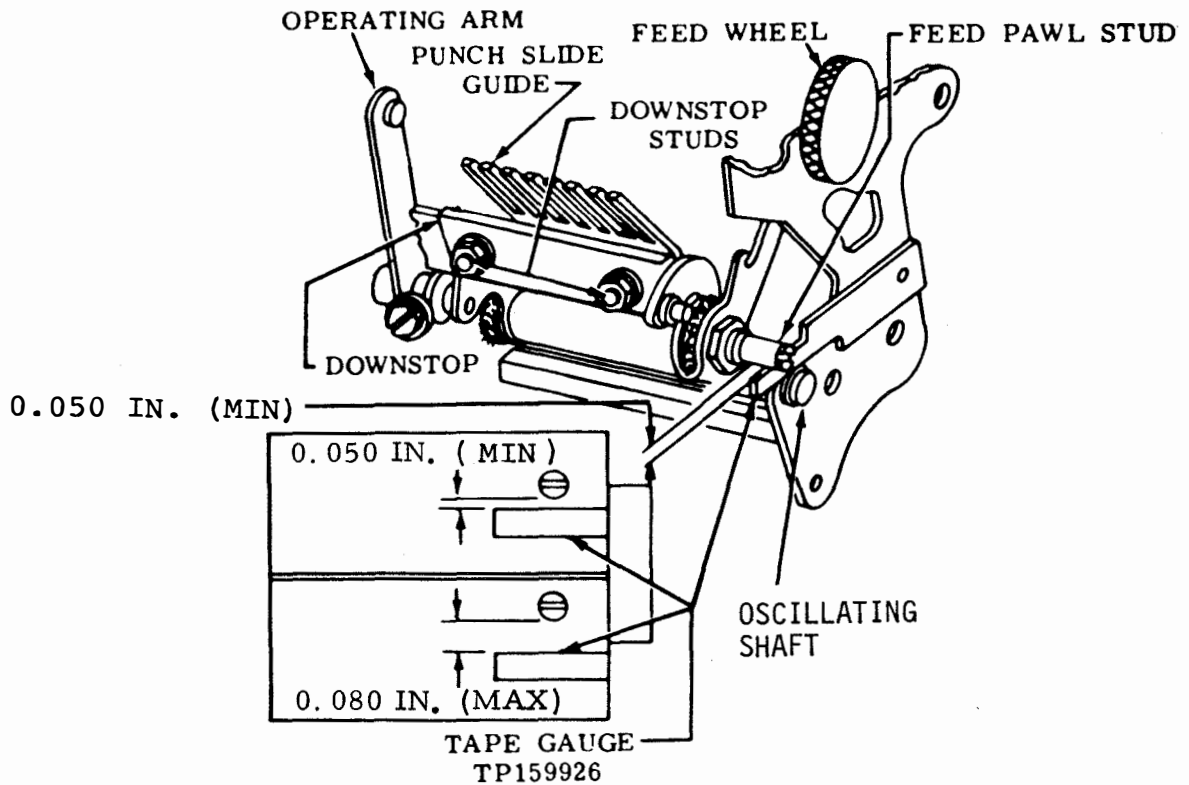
Punch Pin Penetration (For Fully Perforated Tape), Left Side View
